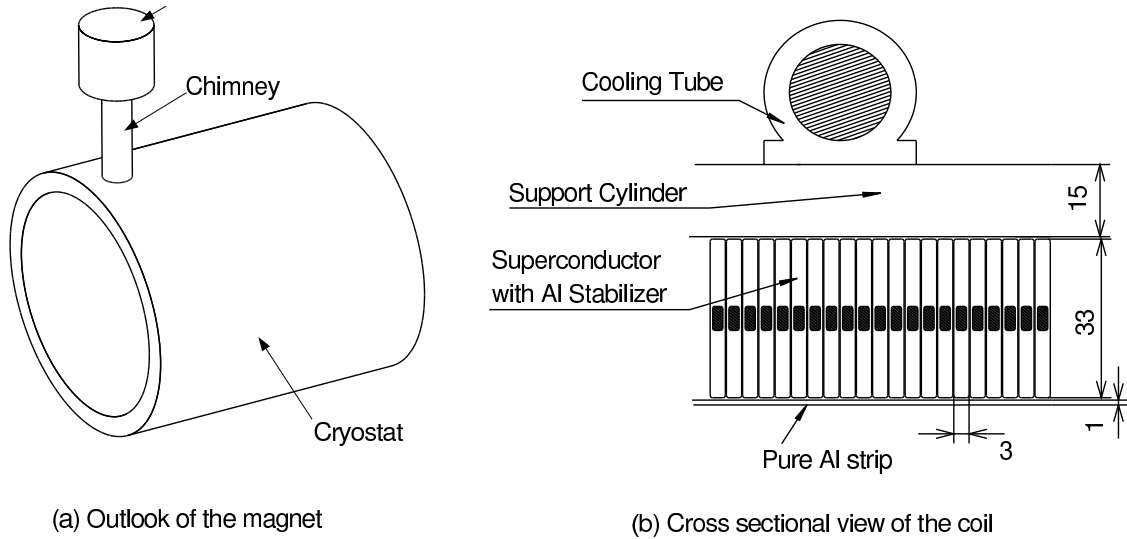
The left figure shows outlook of the solenoid and the right shows a cross sectional view of the coil in units of mm.
